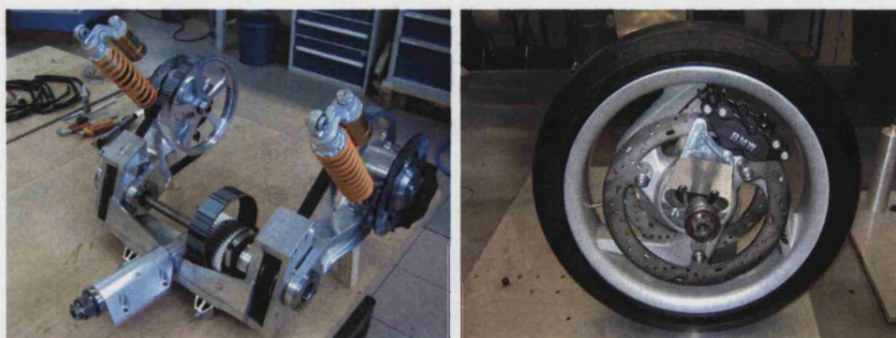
Tilt joint frame assembly and front wheel assembly
